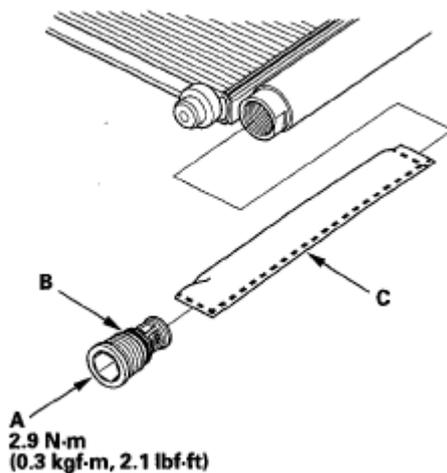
Identifying Desiccant, Cap And O-Ring With Torque Specifications
